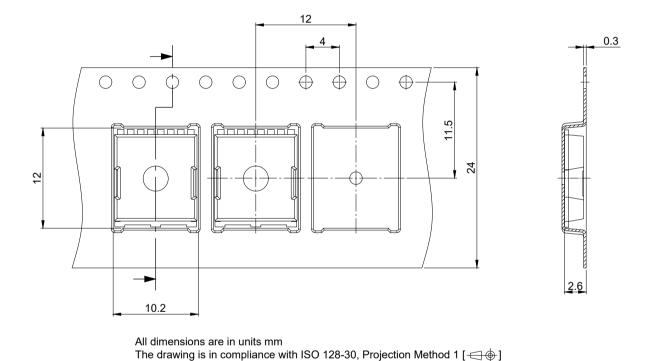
Packaging Variant PG-HSOF-8, dimensions in mm
